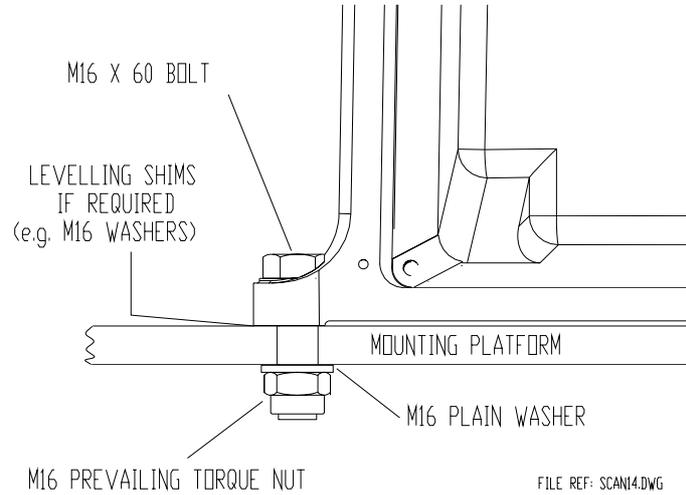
Fixing the Turning Unit to the Mounting Platform
